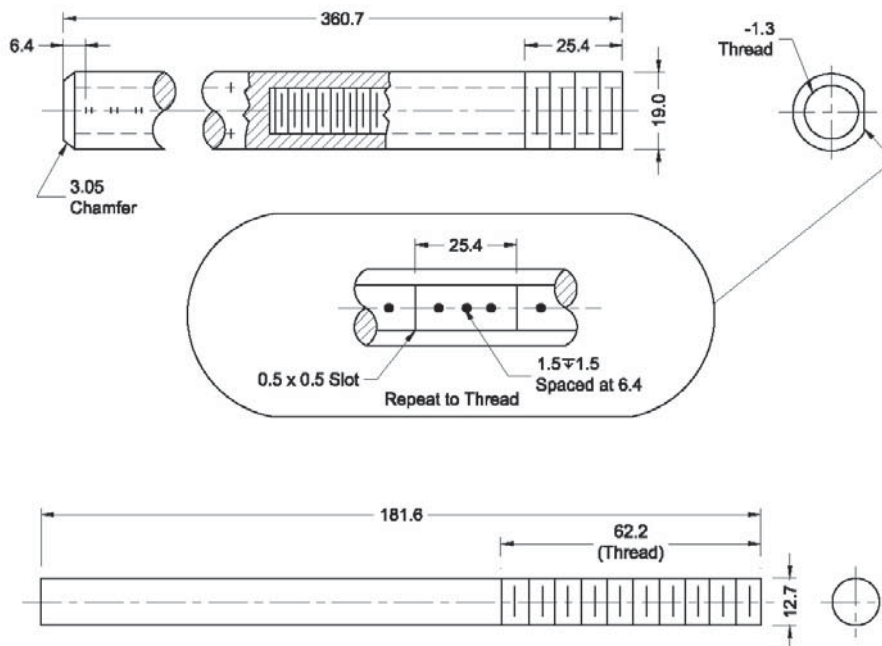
Overall View of the Drilling Stop Gauge to Be Mounted on the Impact Hammer
